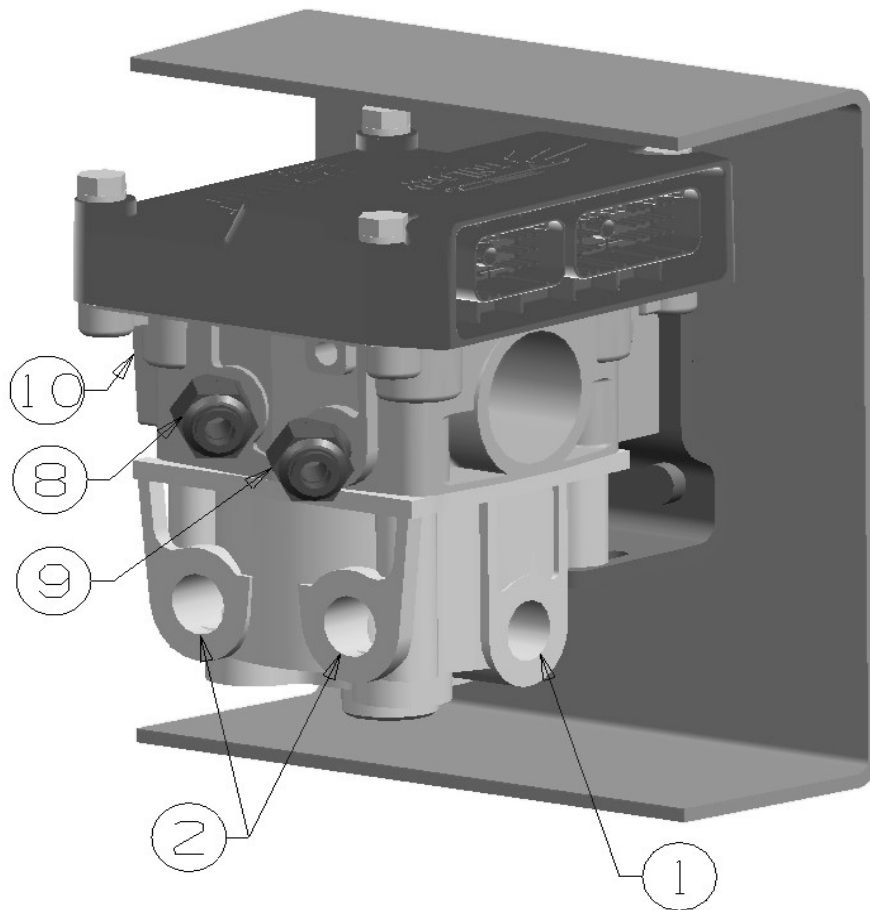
Kit 8900082R91 (Valve Kit) Contains a New Relay Valve with an Internal Double Check Valve, Existing ABS ECU Mounts on Top of the Valve as Shown
